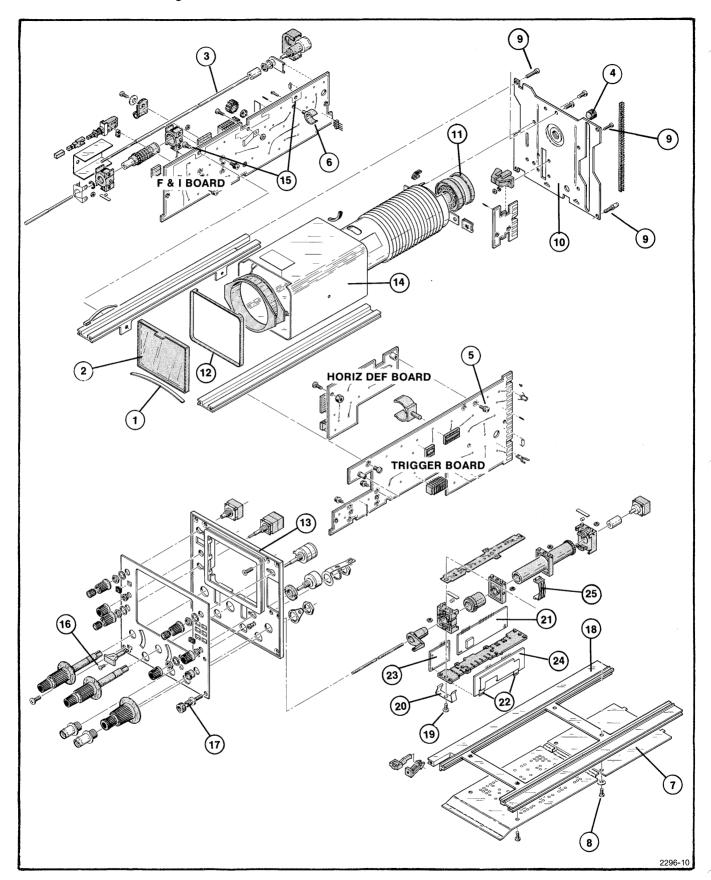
Cathode ray tube, circuit board and cam switch parts details.
